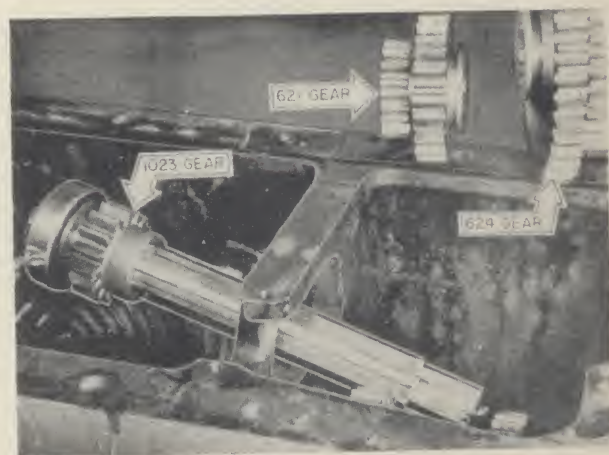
Withdrawing of spline (input) shaft from Super 99 four speed transmission.
